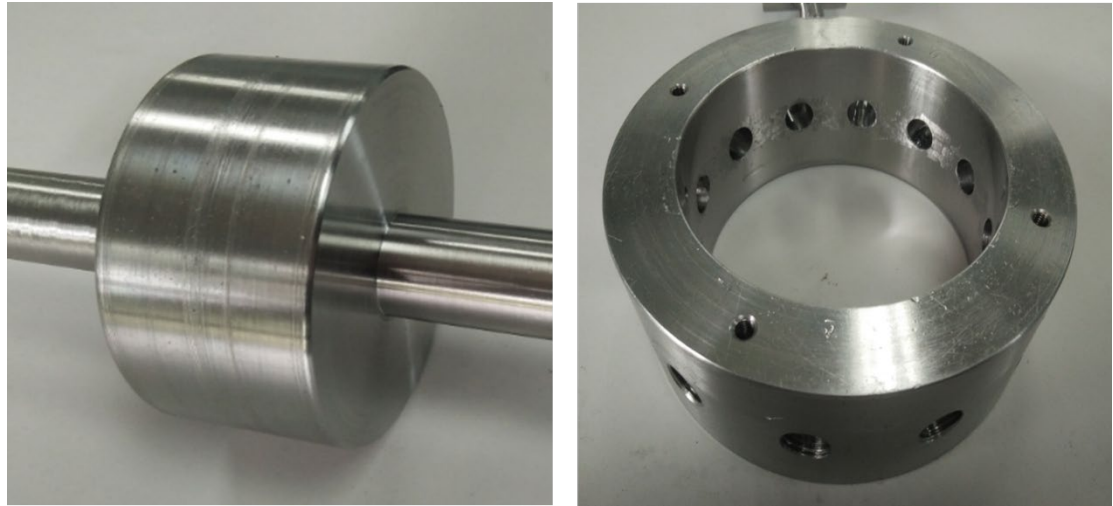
Journal (left) and bearing (right) made of Stainless steel 304
